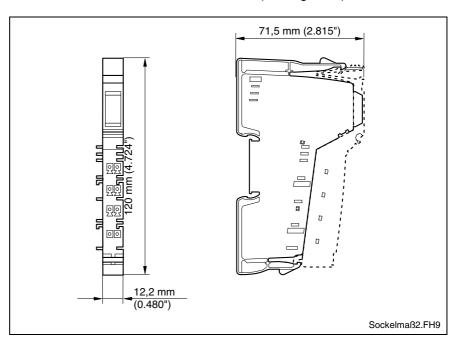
Dimensions of the electronic sockets (2-slot housing)
